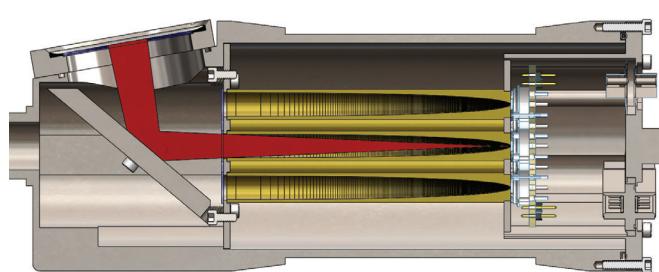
Half-section of the NFR vacuum micro-vessel showing a F#/11.3 (~5° full angle) beam, fold mirror, Winston cones and detector focal plane assembly.
